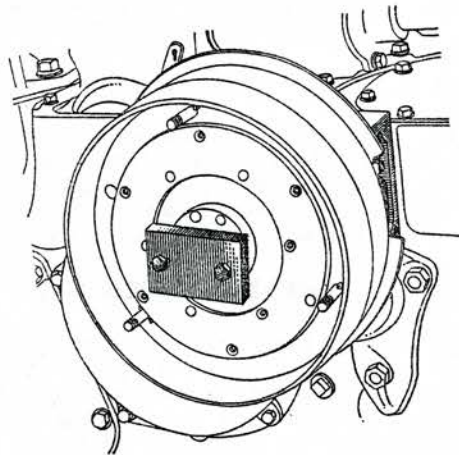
Using plate to pull clutch driving disc from H series tractors after serial No. H-9999
